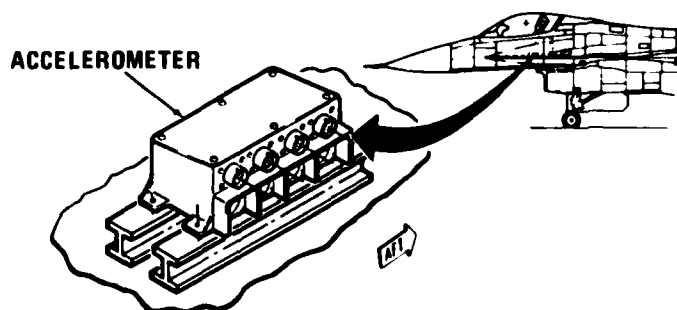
F-16 ACCELEROMETER ASSEMBLY
